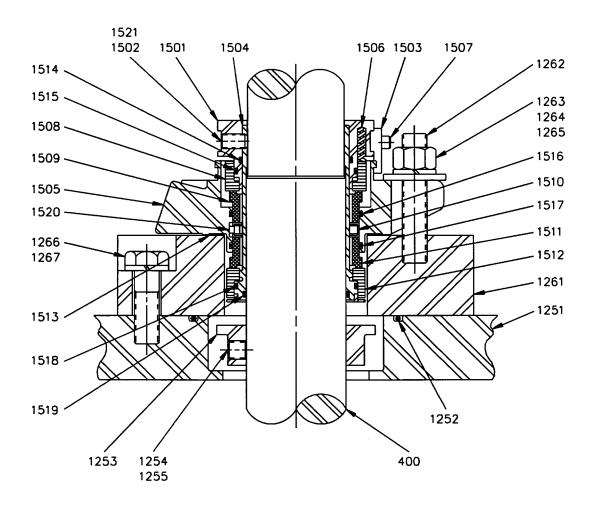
Model GTN, Chesterton 255 Double Mechanical Seal
